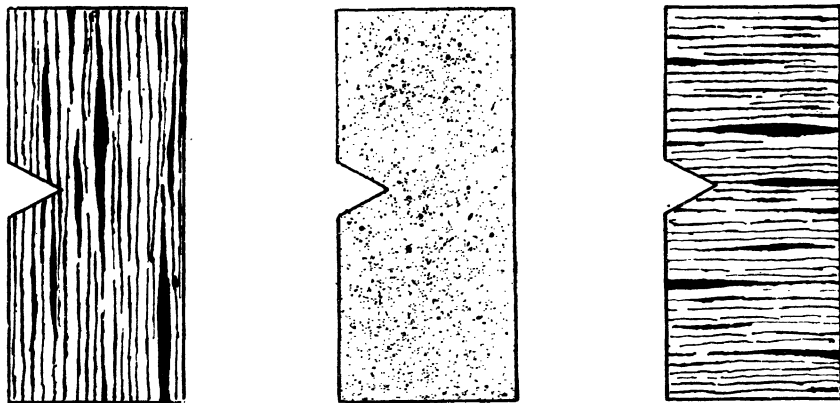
Effect of Seams or Bands on resistance to Fracture. A crack will proceed more readily along a seam than across.
